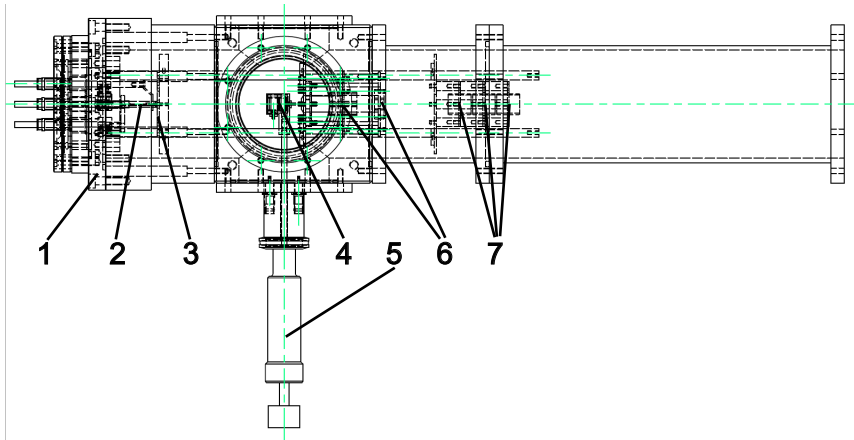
Side cross-section view of the ion source vacuum chamber assembly: 1) ion source flange, 2) tantalum tube, 3) extractor electrode, 4) Faraday cup, 5) linear motion feedthrough, 6) horizontal and vertical steering plates, 7) Einzel lenses.
